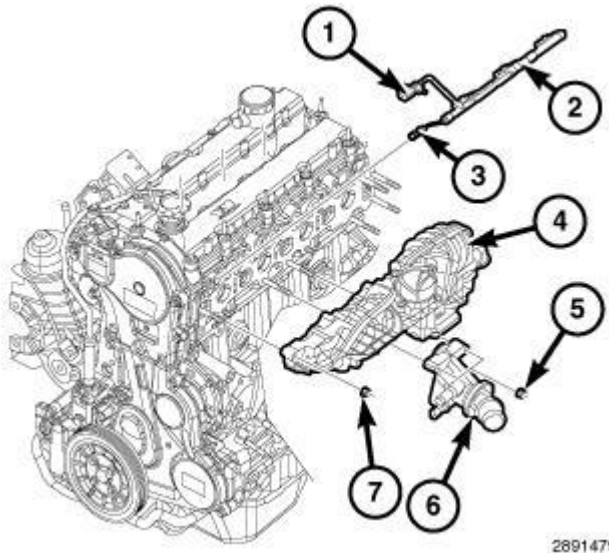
Glow Plug Wire Harness Clip, Wire Harness, Glow Plugs, Intake Manifold, Thermostat Housing & Bolts
